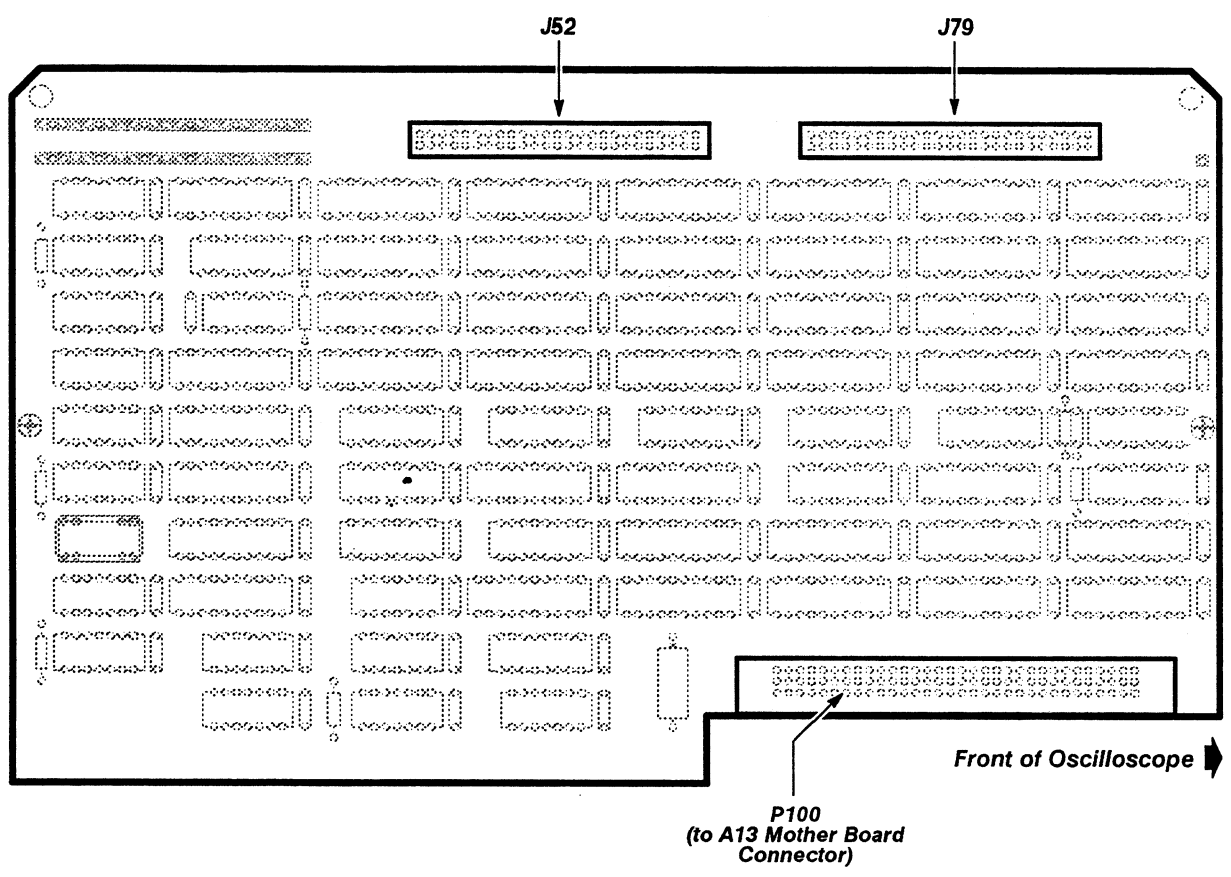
Removing and Replacing the A16 Compressor Board
